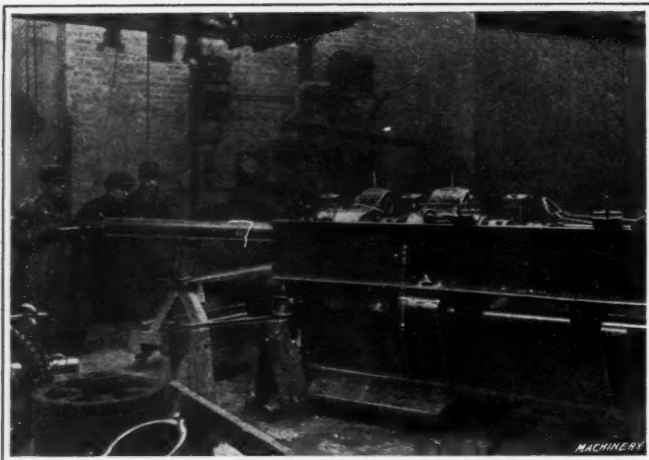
Pushing in Mandrel which locates Spindle Bearings in Alignment with each other and with Ways on Lathe Bed
